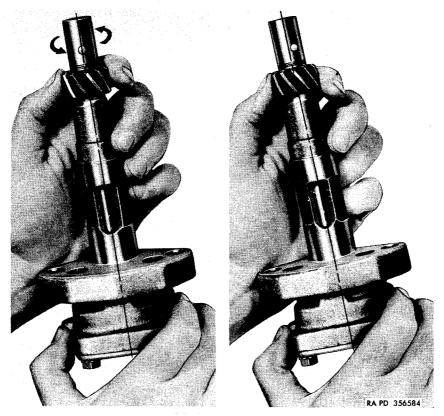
Positioning of distributor drive gear ready for installation of oil pump.
